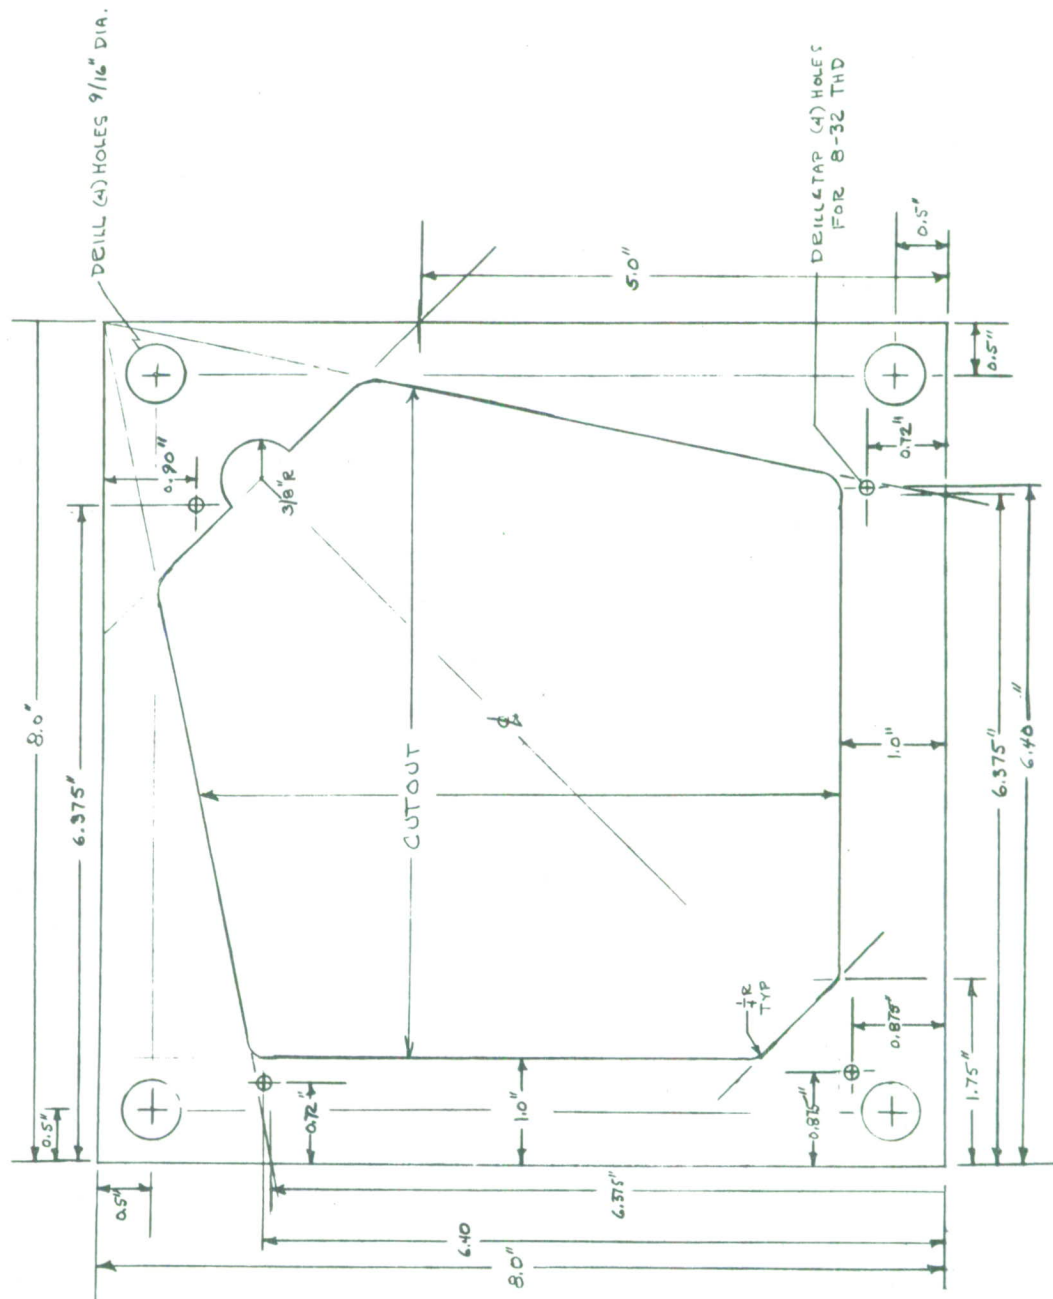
Head Alignment Jig Bottom Plate Make (1) From  $\frac{3}{4}$ " Alum.
